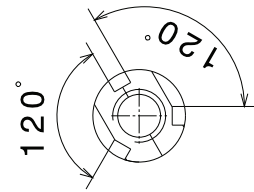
Technical drawing of the pitched-bladed impellers for the 100 mL-scale crystallizer.
